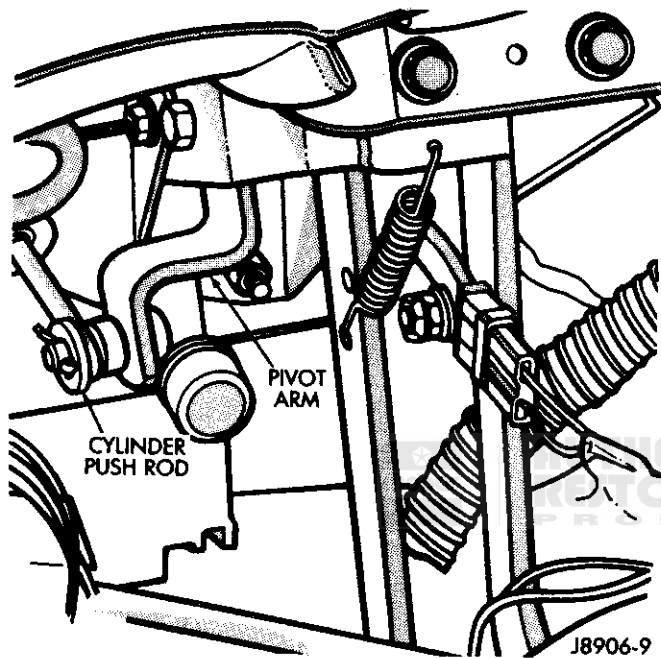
Push Rod Removal/Installation — XJ/MJ
